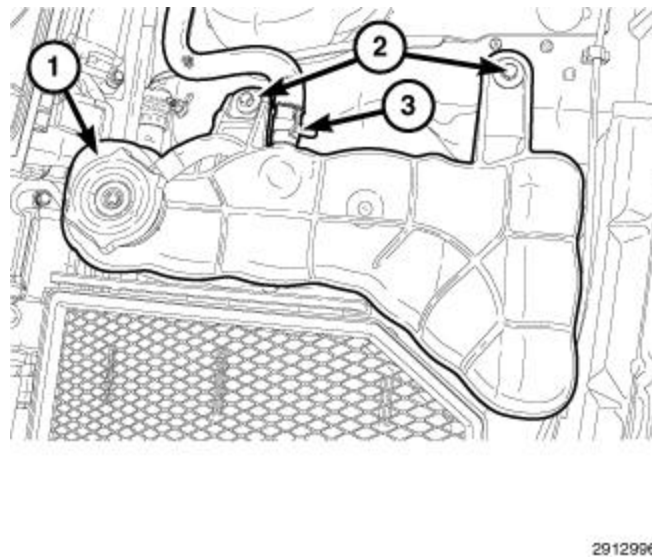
Coolant Recovery Container Pressure Cap, Tube & Screws
